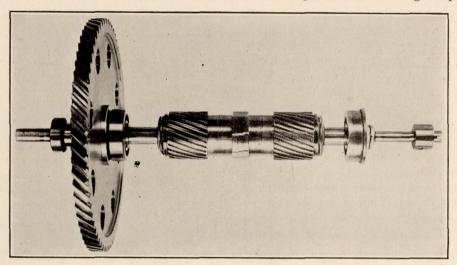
Camshaft assembly—cam parts displaced slightly from aligned position
